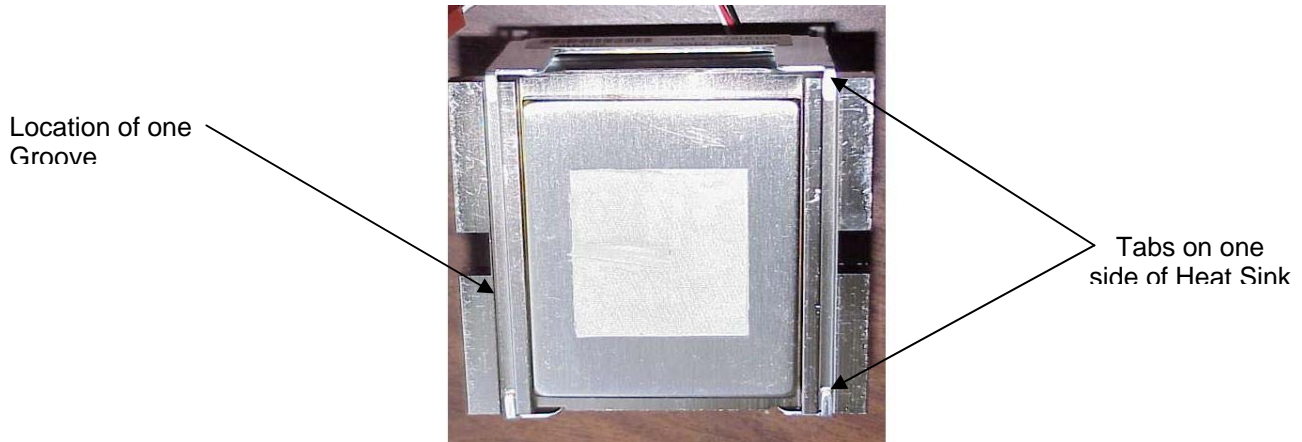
Location of Tabs and Groove used to hold Shroud and Fan Assembly to Heat Sink ('329 heat sink)
